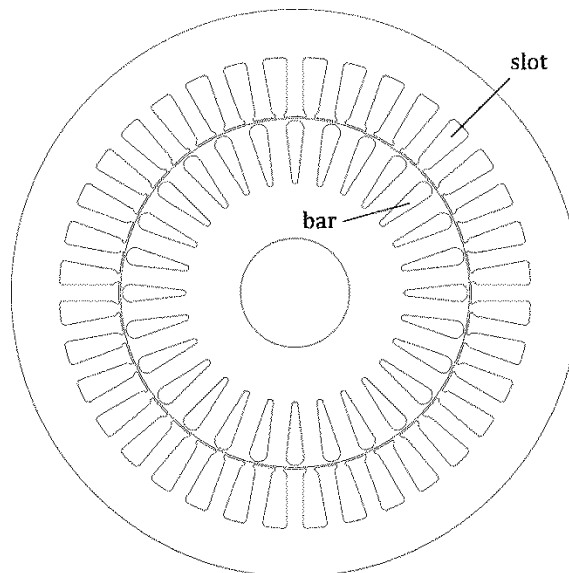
Cross-section of a squirrel cage induction motor (SCIM)
